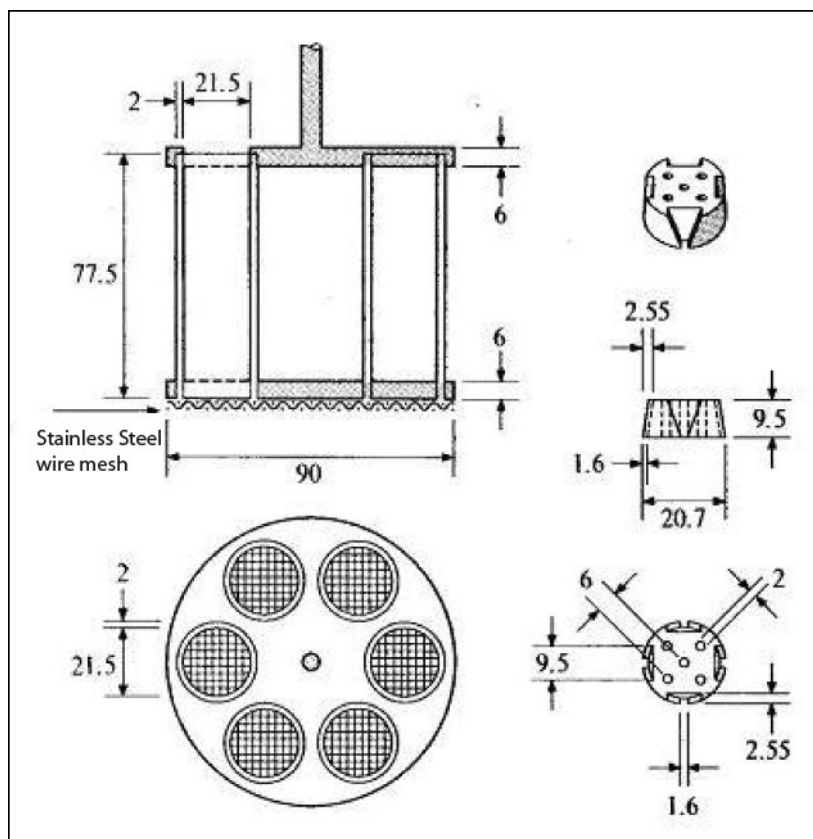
Apparatus for testing the disintegration of tablets and capsules (dimensions in mm).
